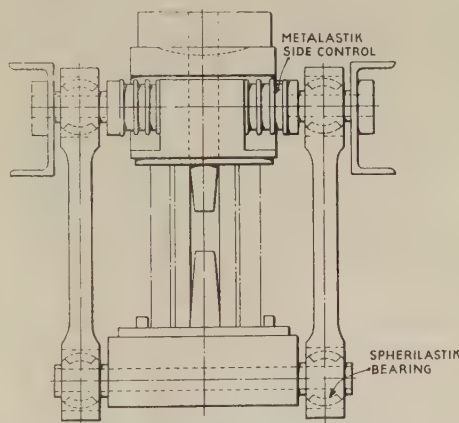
Swing bolster with Metalastik bearings in the swing links and helical steel bolster springs.
